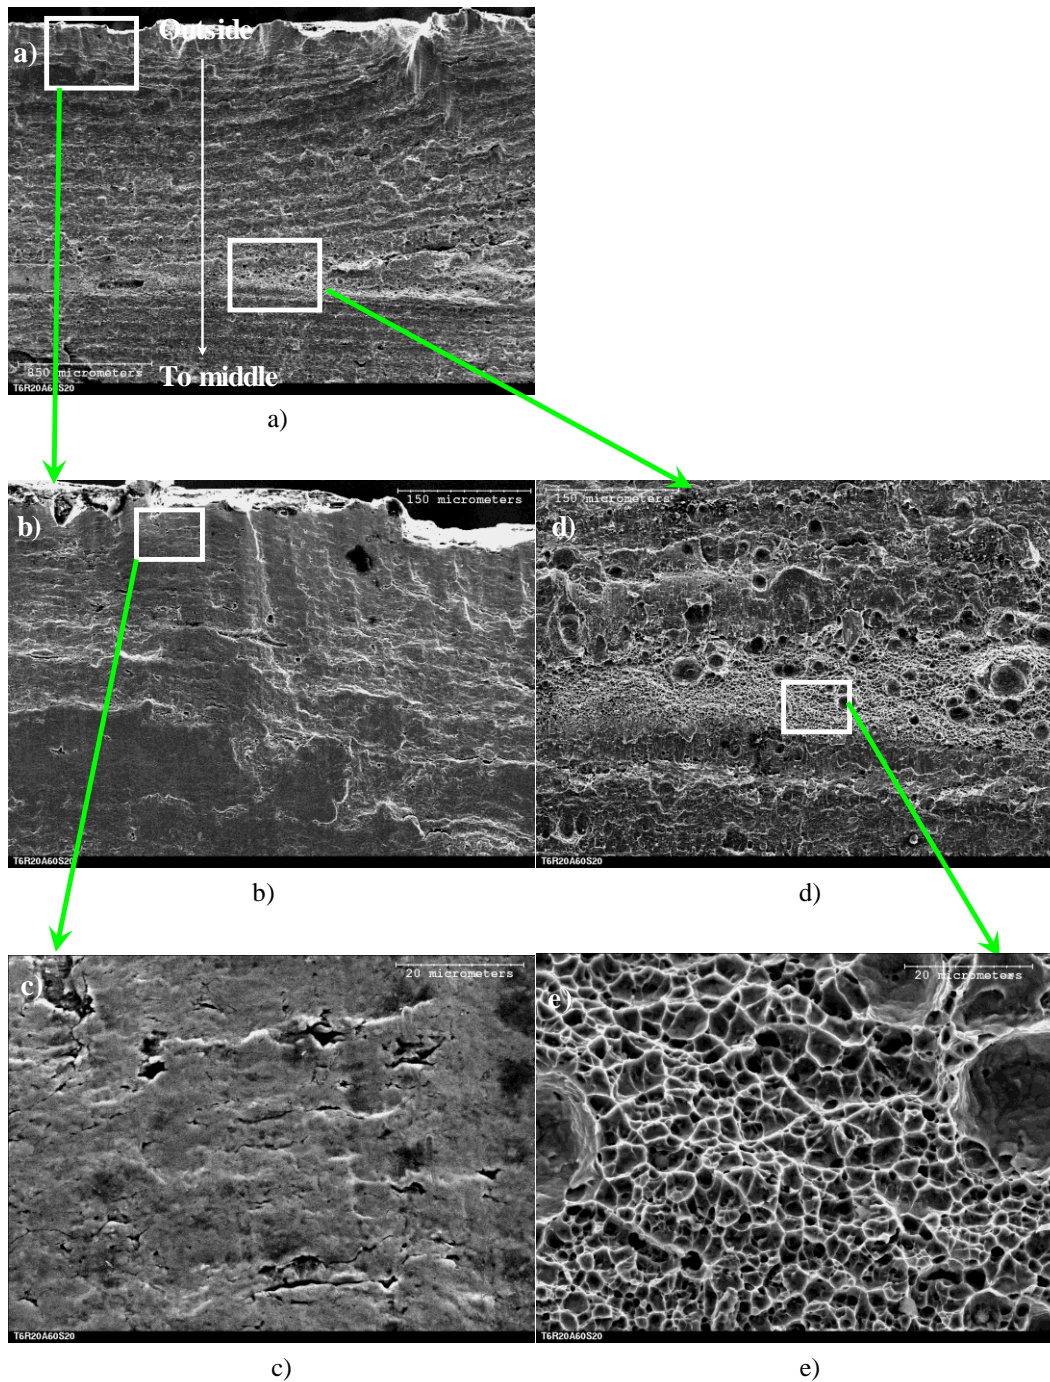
Top half of the fracture surface of specimen T6R20A60S20 (SEM)
